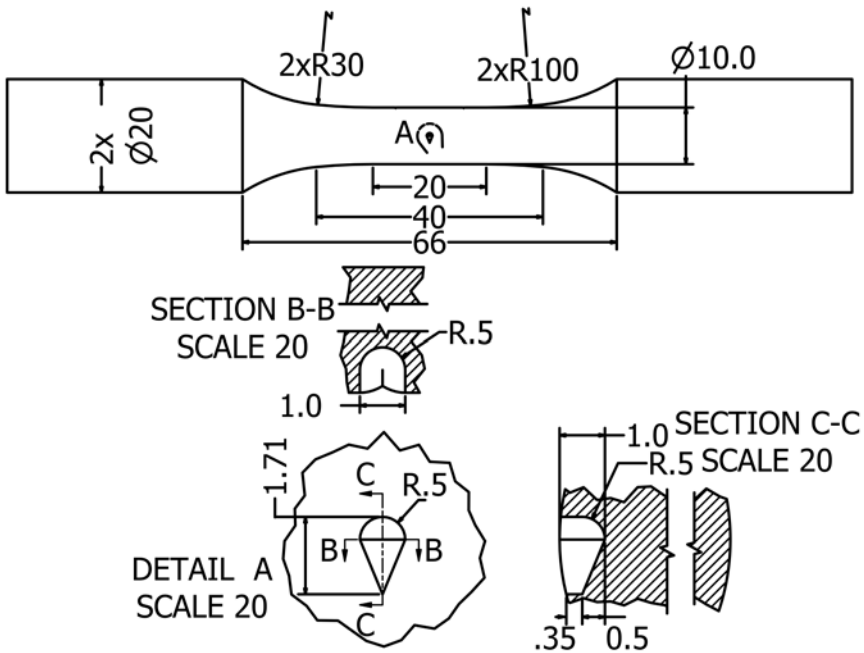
Geometry and dimensions for notched test bars used in Paper C.
